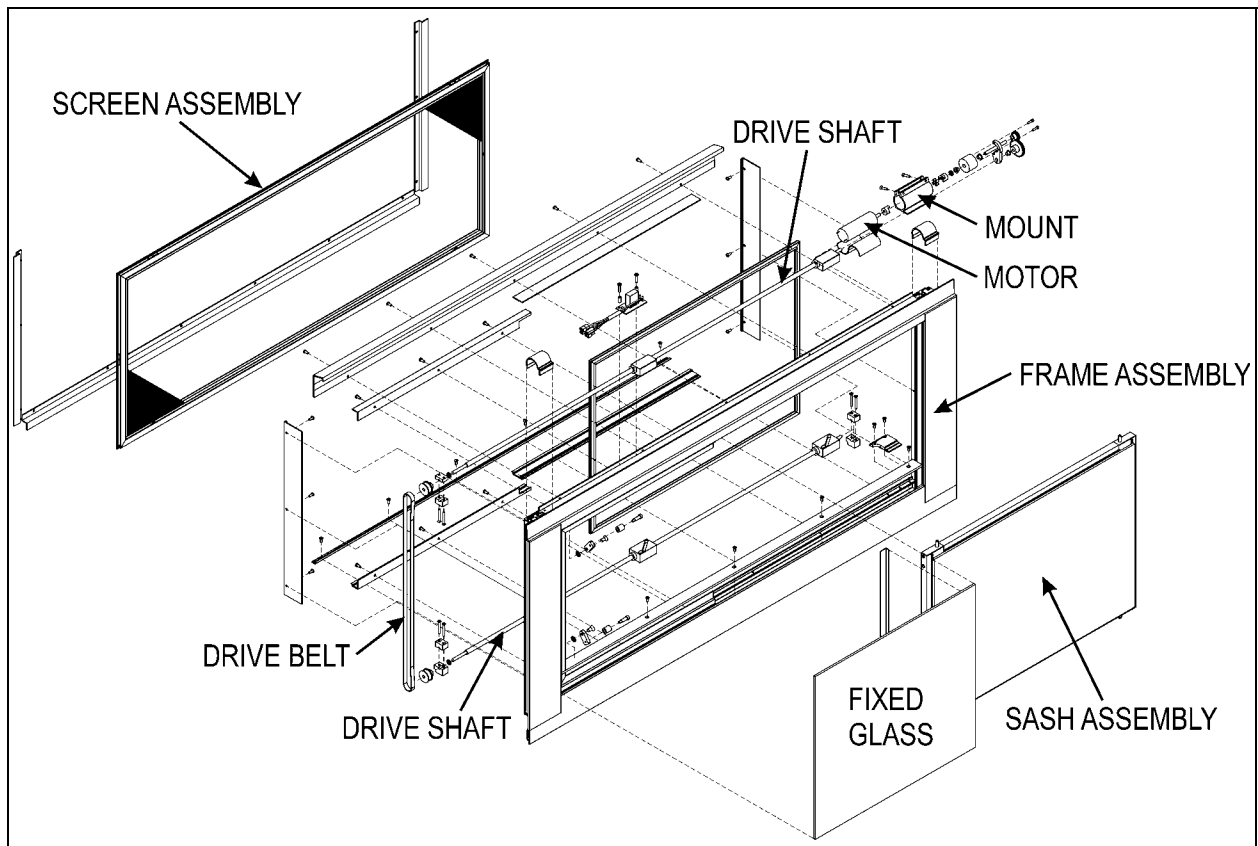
ELECTRIC SLIDING WINDOW EXPLODED VIEW
